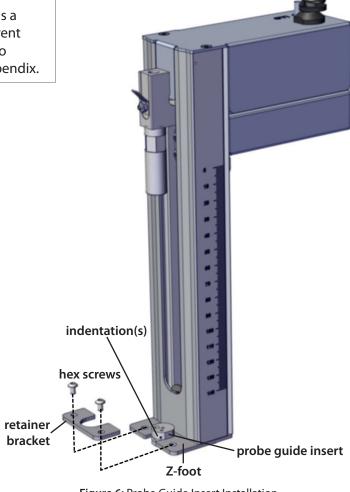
Probe Guide Insert Installation (Standard Retainer Bracket)
